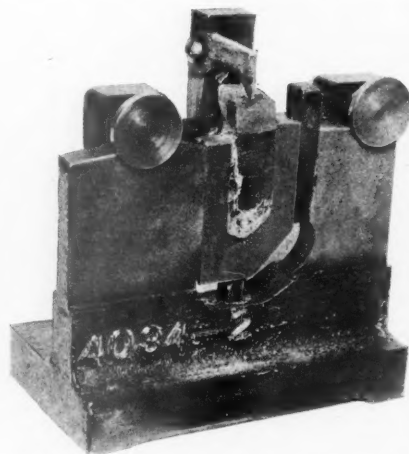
Gage for Setting Cutters in the Taylor-Newbold Saw.
